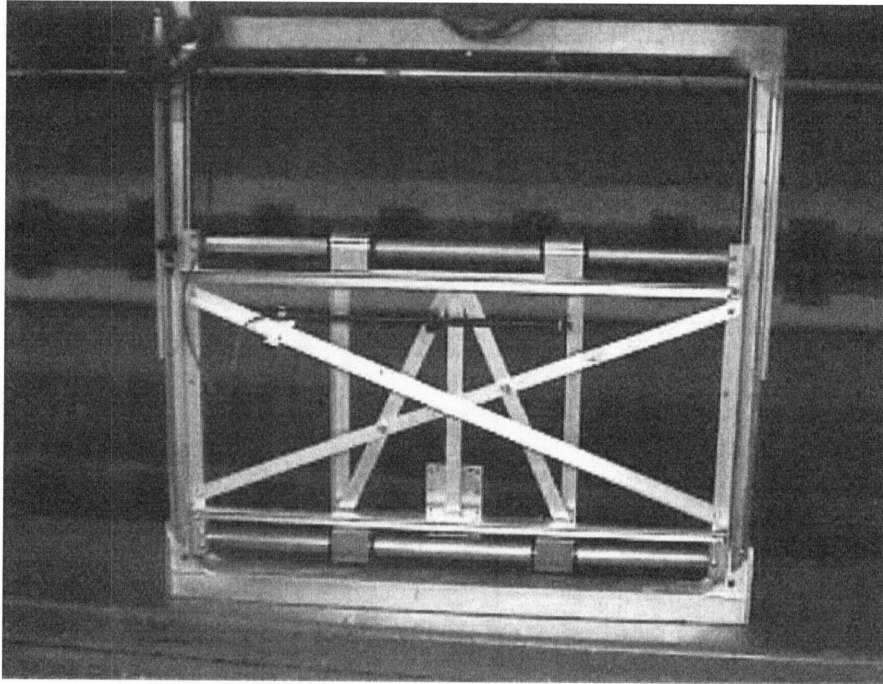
Individual guide railing assembly. In-line (horizontal) bearing assembly rides on the cross-flow (vertical) bearing assembly.
